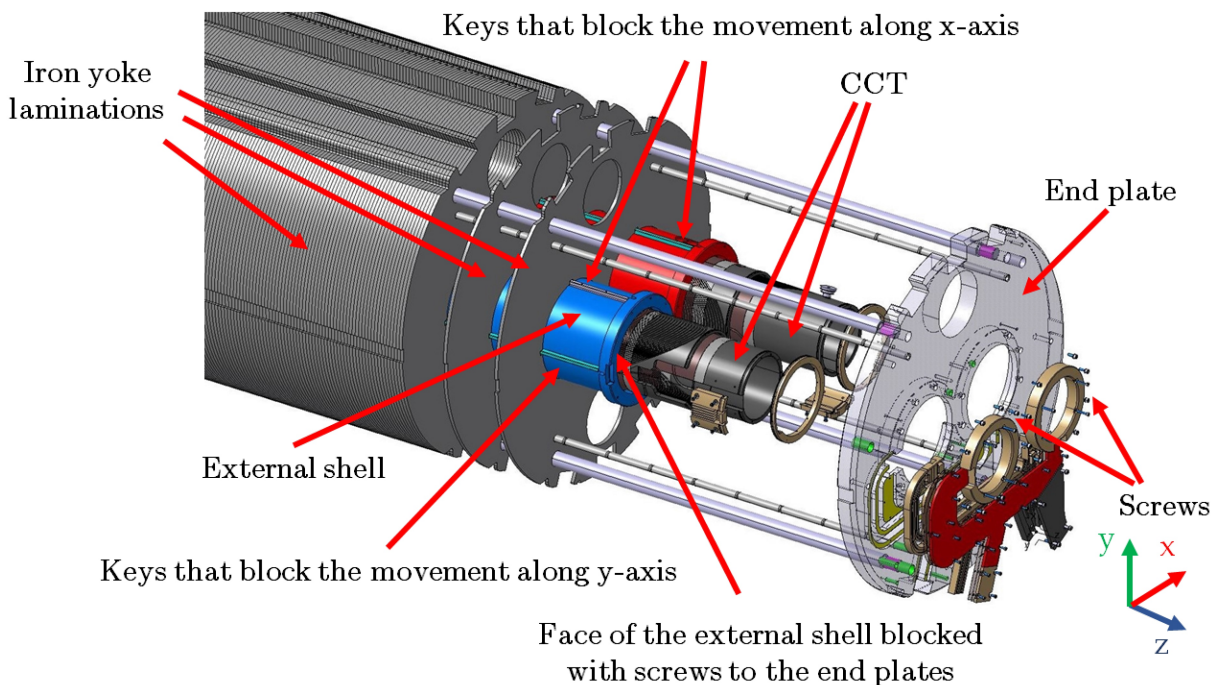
Exploded view of the drawing LHCMCBRD0050 (Courtesy of Glyn Kirby).
